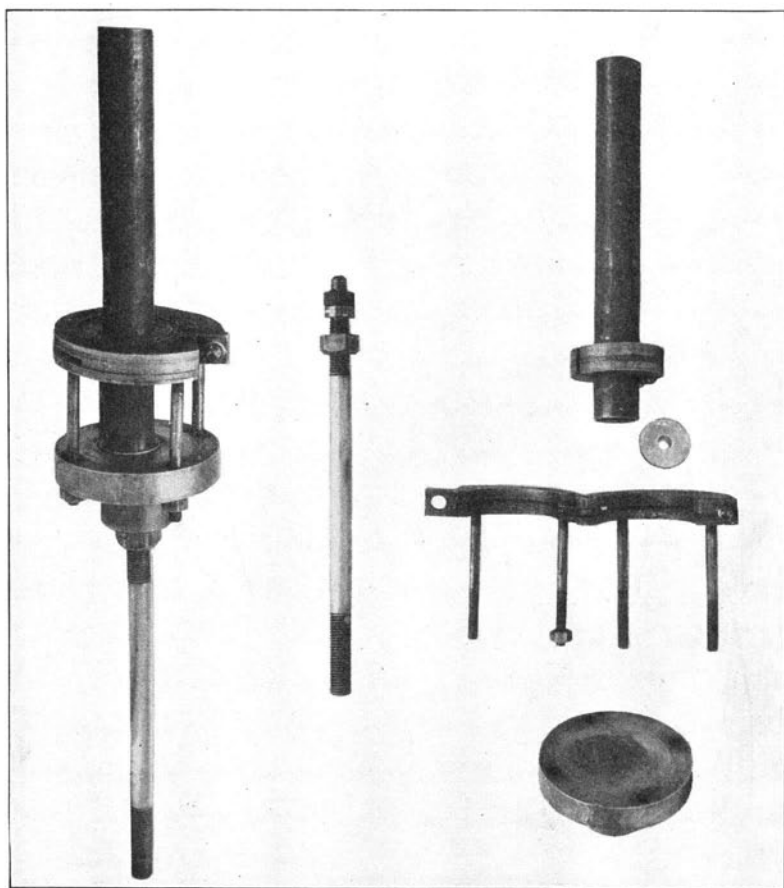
PARTS OF CLAMP FOR STOPPING END OF TUBE
